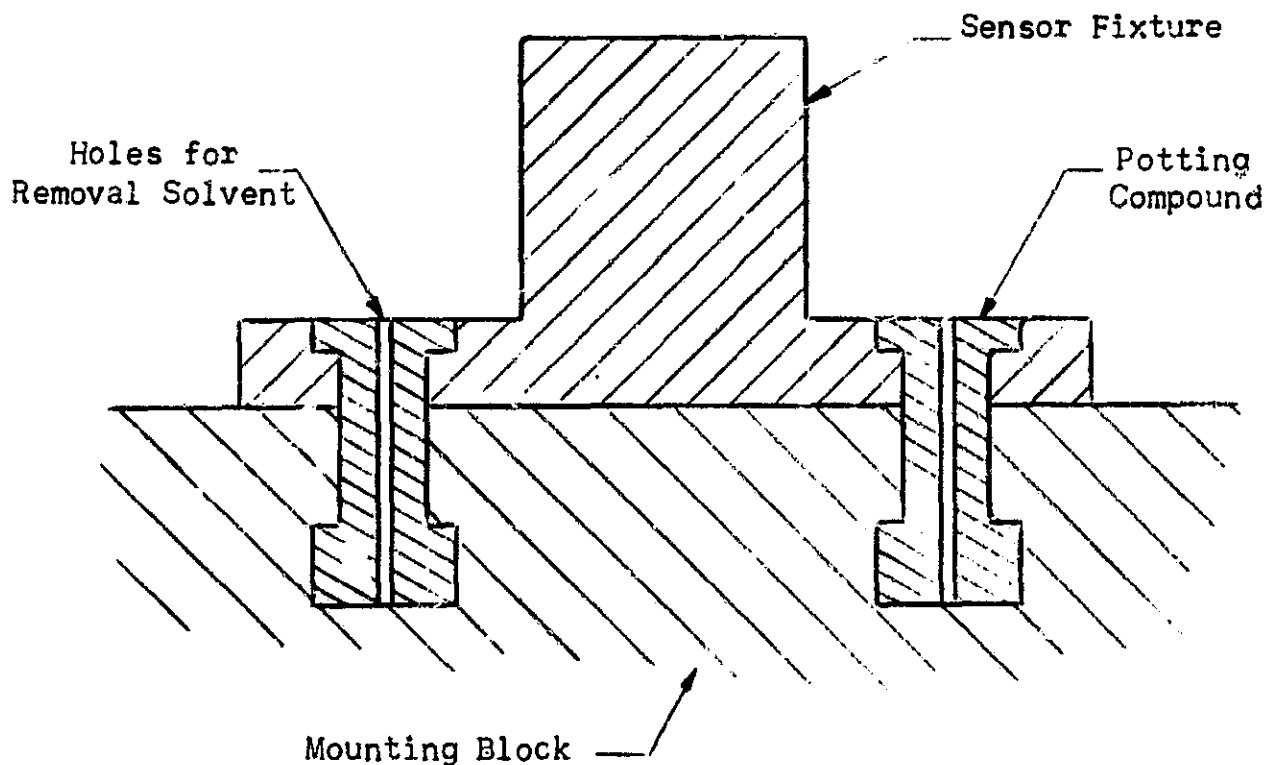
Clamping the Sensor Fixture Using Dowel Potting Techniques
